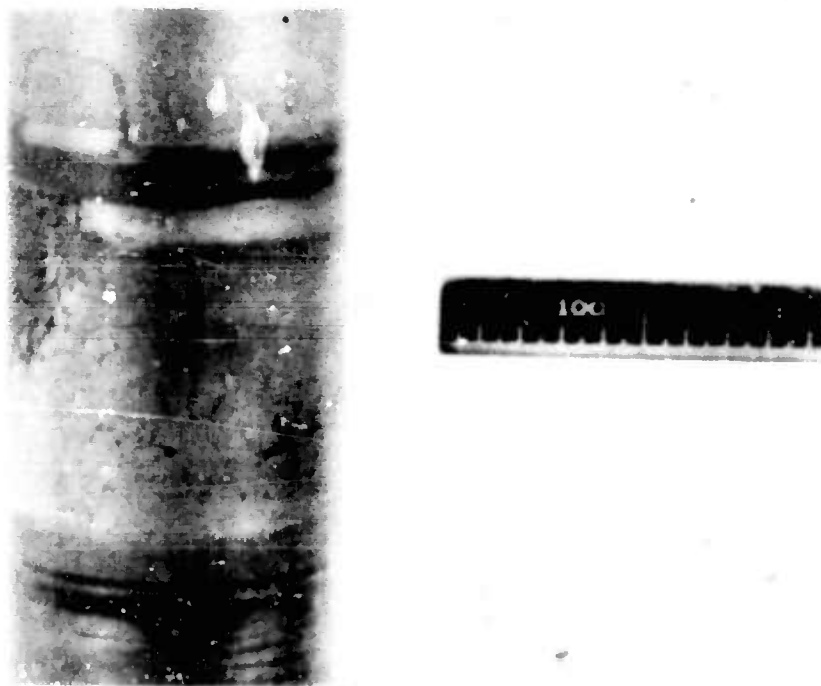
B26008 (Bottom): Rear Roller Bearing Surface of Transmission Cluster Gear Shaft.
